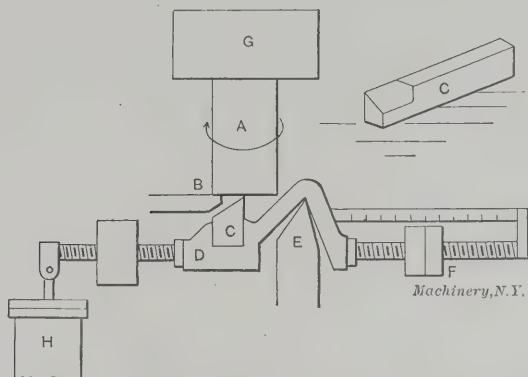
Diagrammatical View of Action of Tool Steel Testing Machine
